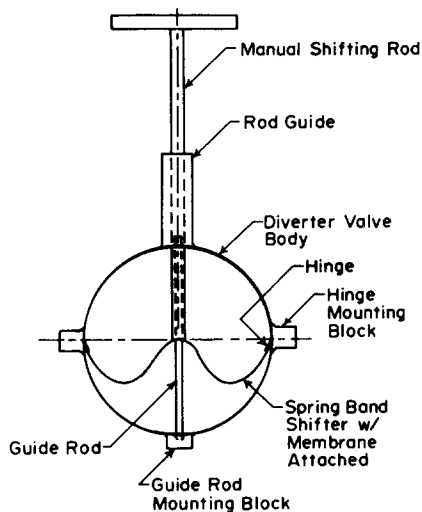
Cross-section diagram of a style 1 diverter valve with a stainless steel, spring-band shifter.
